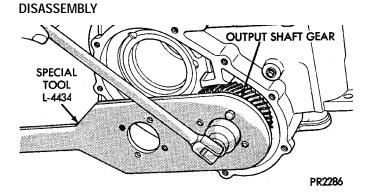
Remove Output Shaft Retaining Nut and Washer
